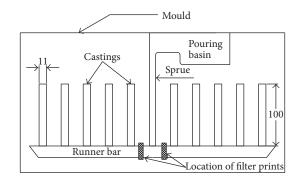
Shape and dimensions of the sand mould used in the experiment (dimensions are in mm).
